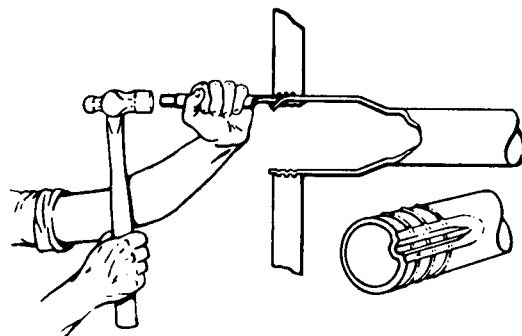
STEP (3) IN TUBE REMOVAL – END VIEW OF TUBE SHOWS EFFECT ON TUBE
